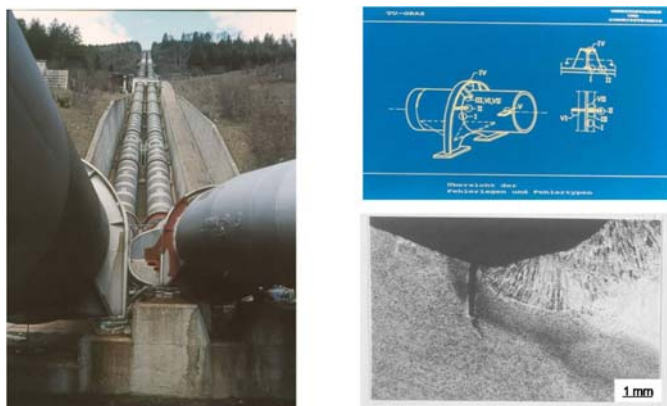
Type IV cold cracking on penstock Q+T fine grain steel [6].
